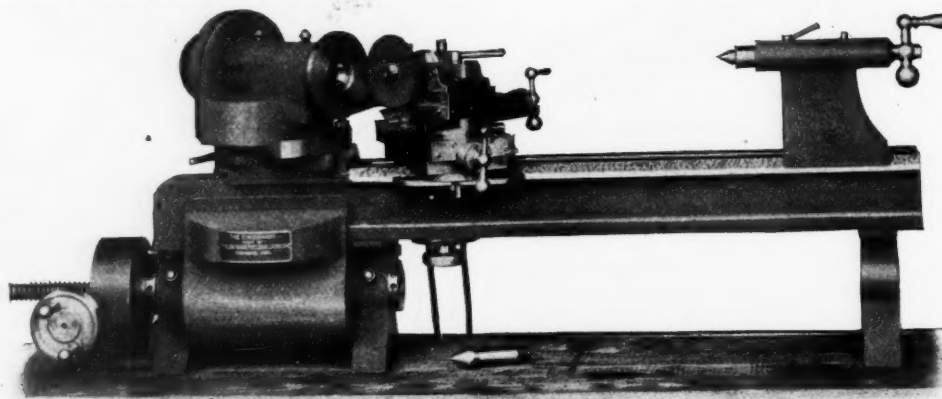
Swivel-head Lathe arranged for Face Grinding
